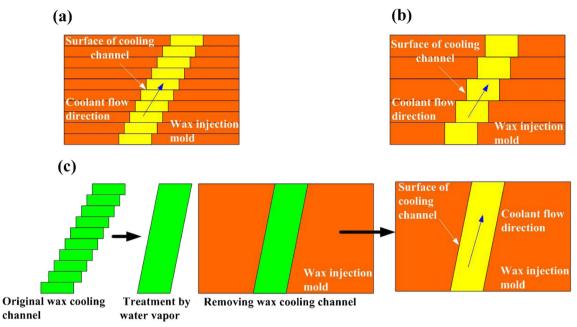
Schematic illustration of the surface of conformal cooling channels inside the wax injection molds fabricated by a selective laser sintering or selective laser melting technologies, b diffusion bonding technology, and c the method proposed in this study
